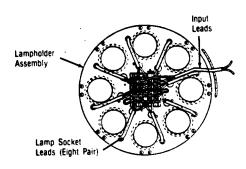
LAMP HOLDER TERMINAL BLOCK CONNECTIONS.
